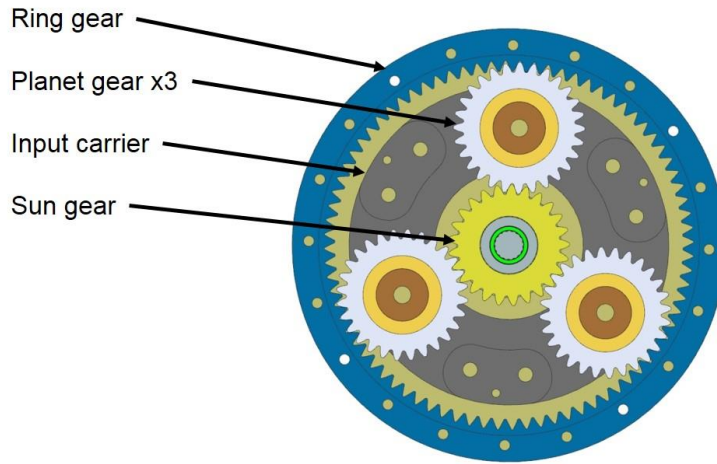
Open gearbox showing planetary design with 3 planet gears
